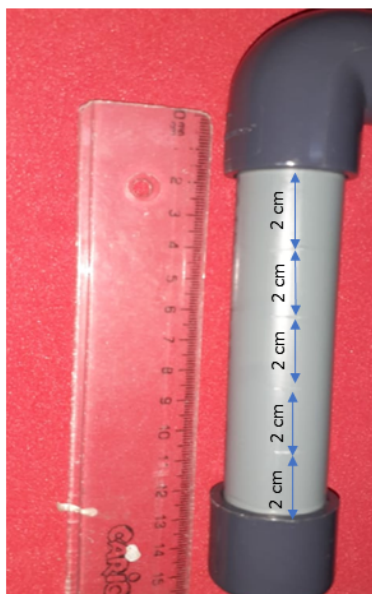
We proceeded to mark the 2 cm in the tube to pass the cable.
